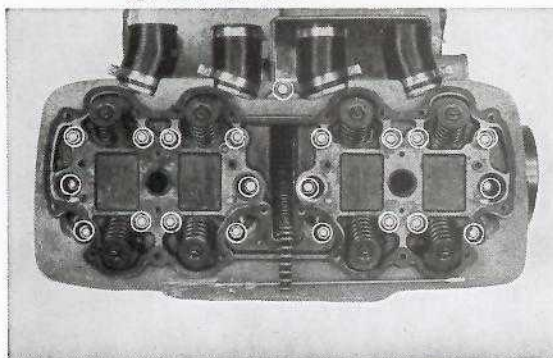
Removing cylinder head mounting nuts and bolts
